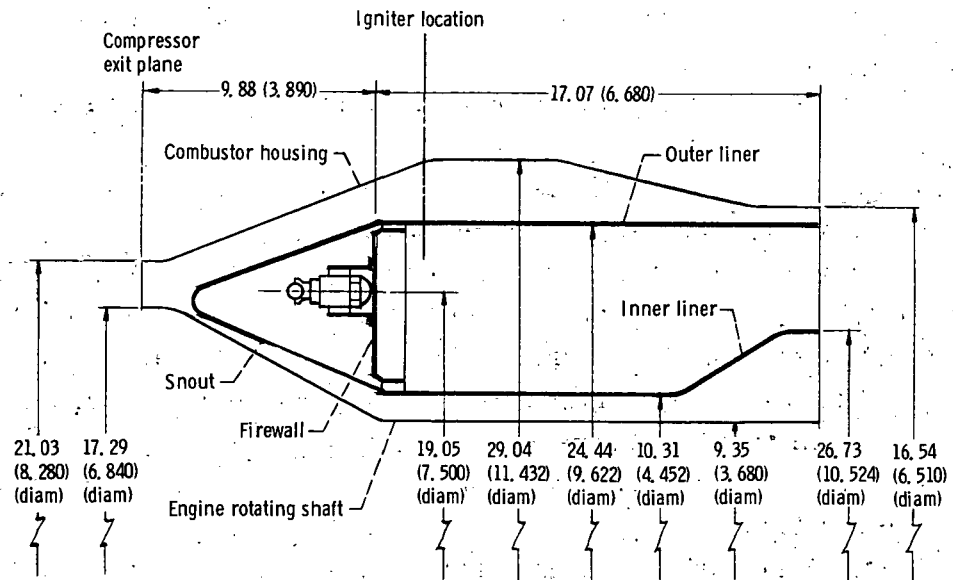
Dimensions of low-cost combustor. Dimensions are in centimeters (in.).
